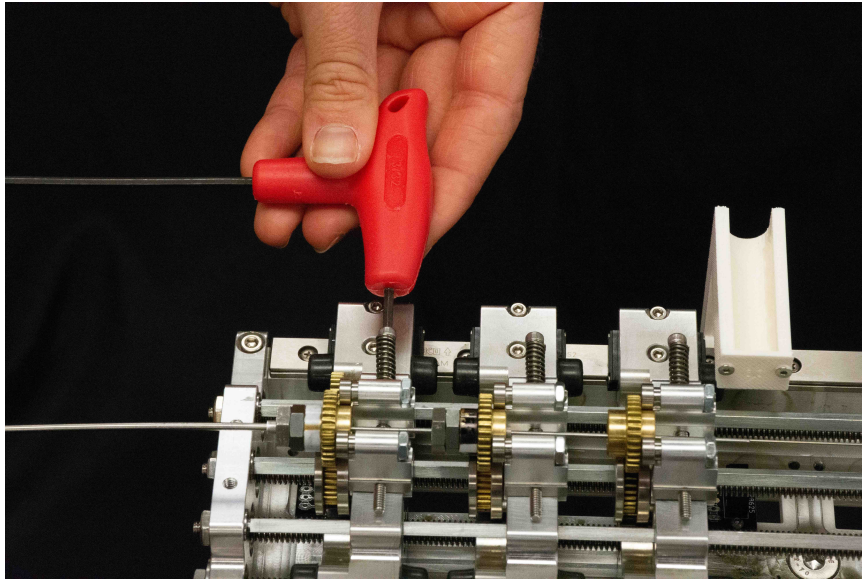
The pre-load of the spring-loaded levers can be adjusted with a set screw before tool loading.
